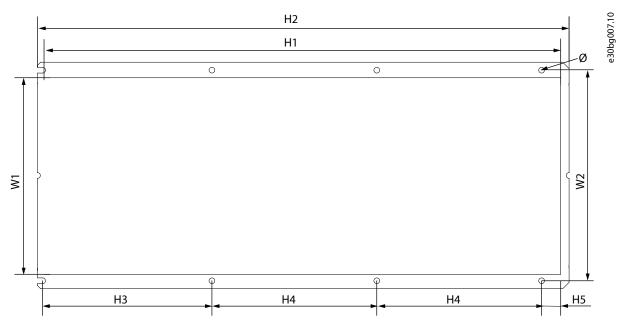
Dimensions of the Opening and Drive Outline with Flange, FR8
